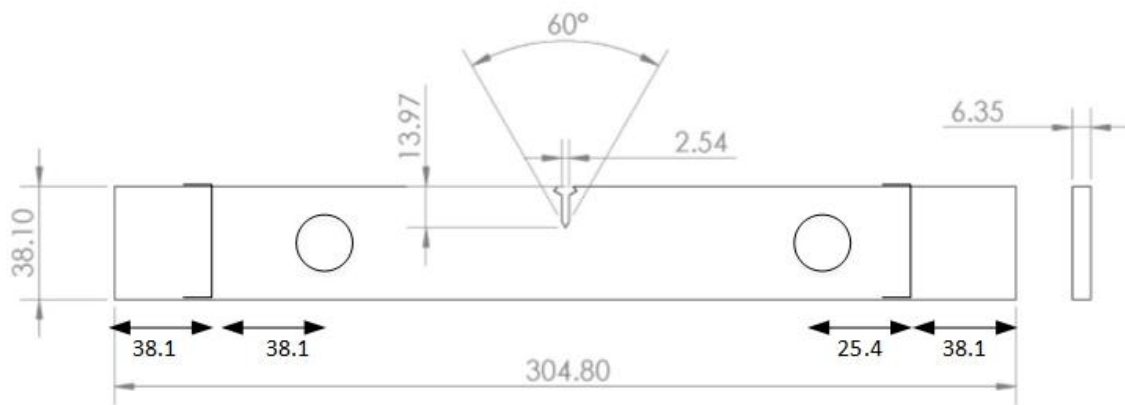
Secondary specimen design in mm (Aluminum 6061-T6)
